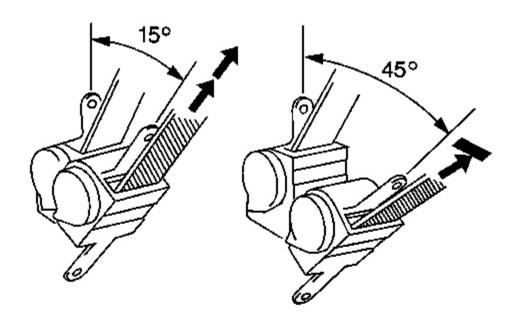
Tilting Seat Belt Retractor Courtesy of GENERAL MOTORS CORP.
